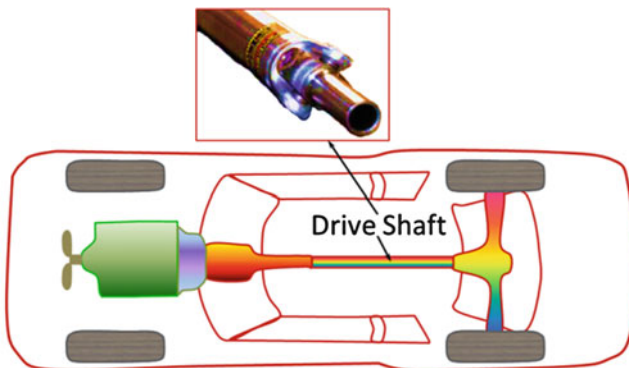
Automotive drive shaft made of Al matrix composite (Courtesy to www.dennysdriveshaft.com)
